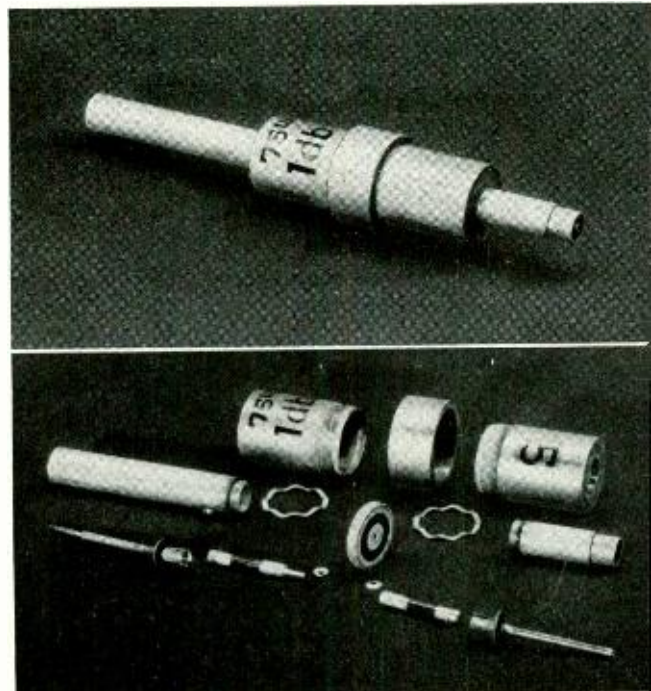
A 1 db coaxial attenuator; assembled above; and component parts below
